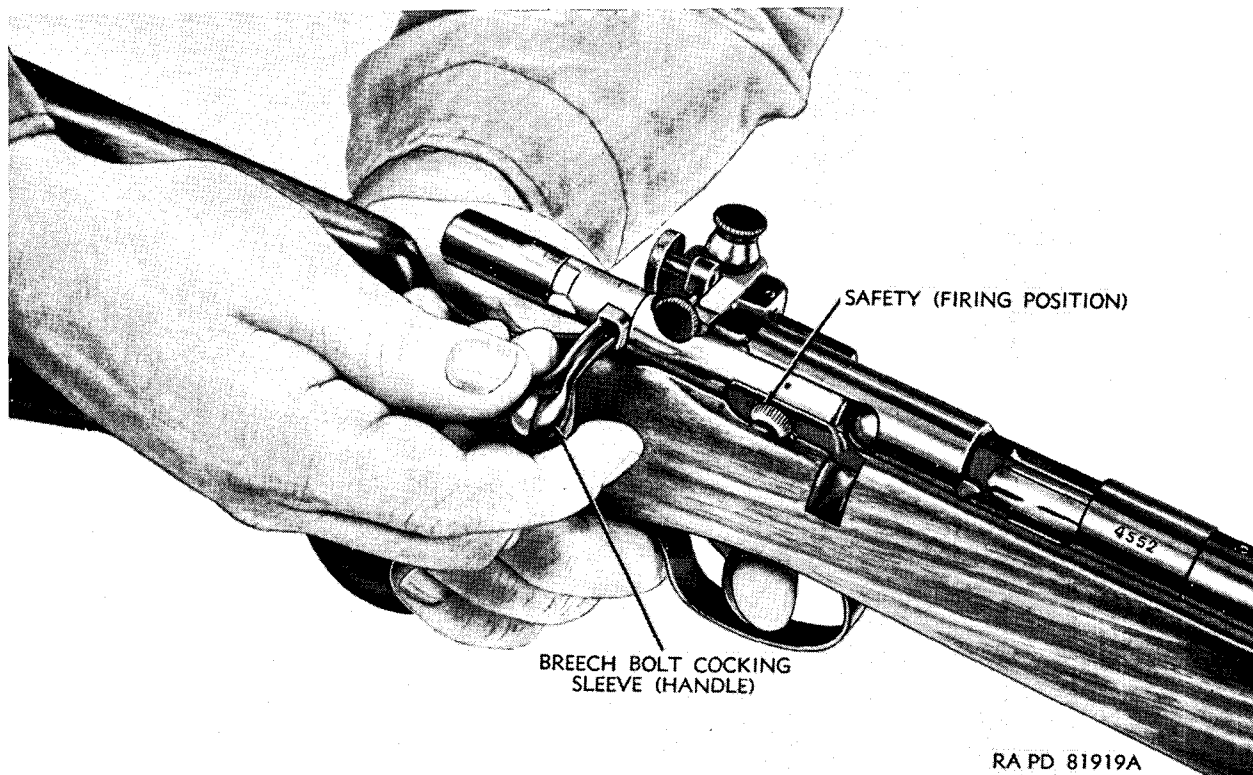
Removing or installing breech bolt assembly (Winchester rifle M75T).
